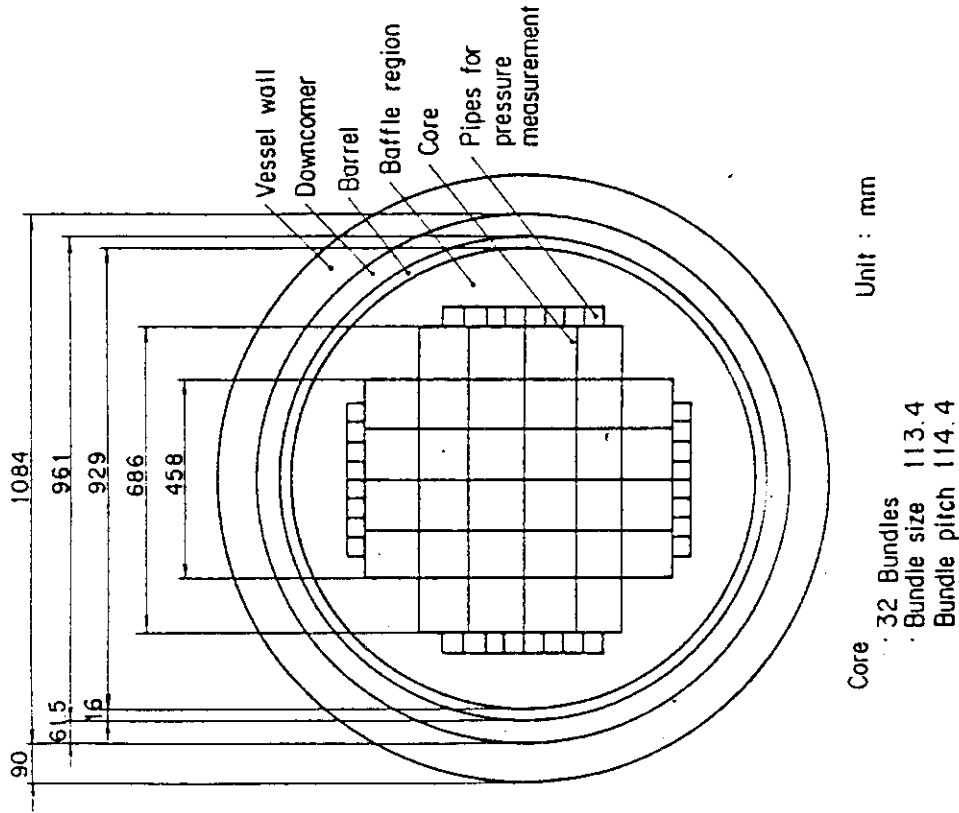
Dimension of CCTF Core-II pressure vessel cross section
